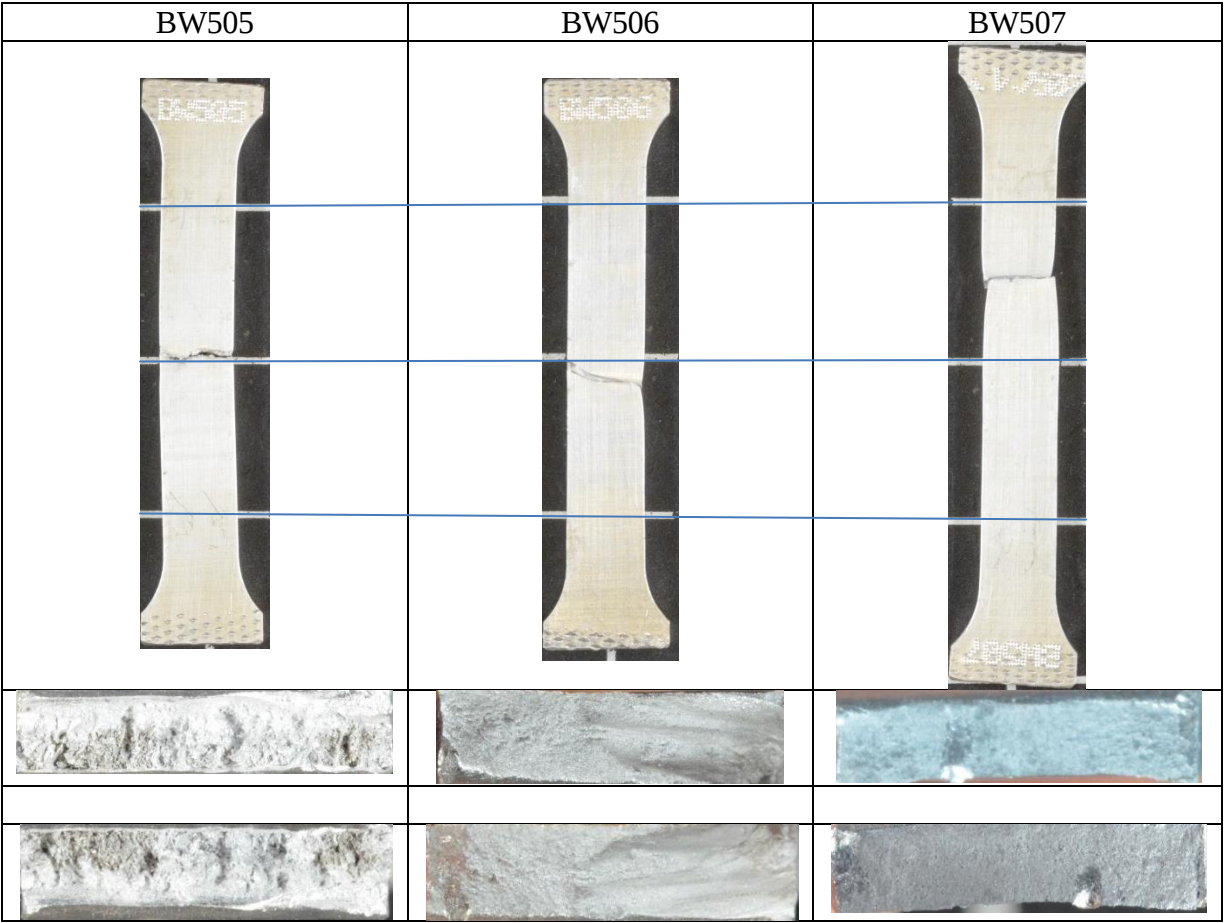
Fracture surface of AA5086-AA5086 welds at Waipahu for 1-year exposure.
